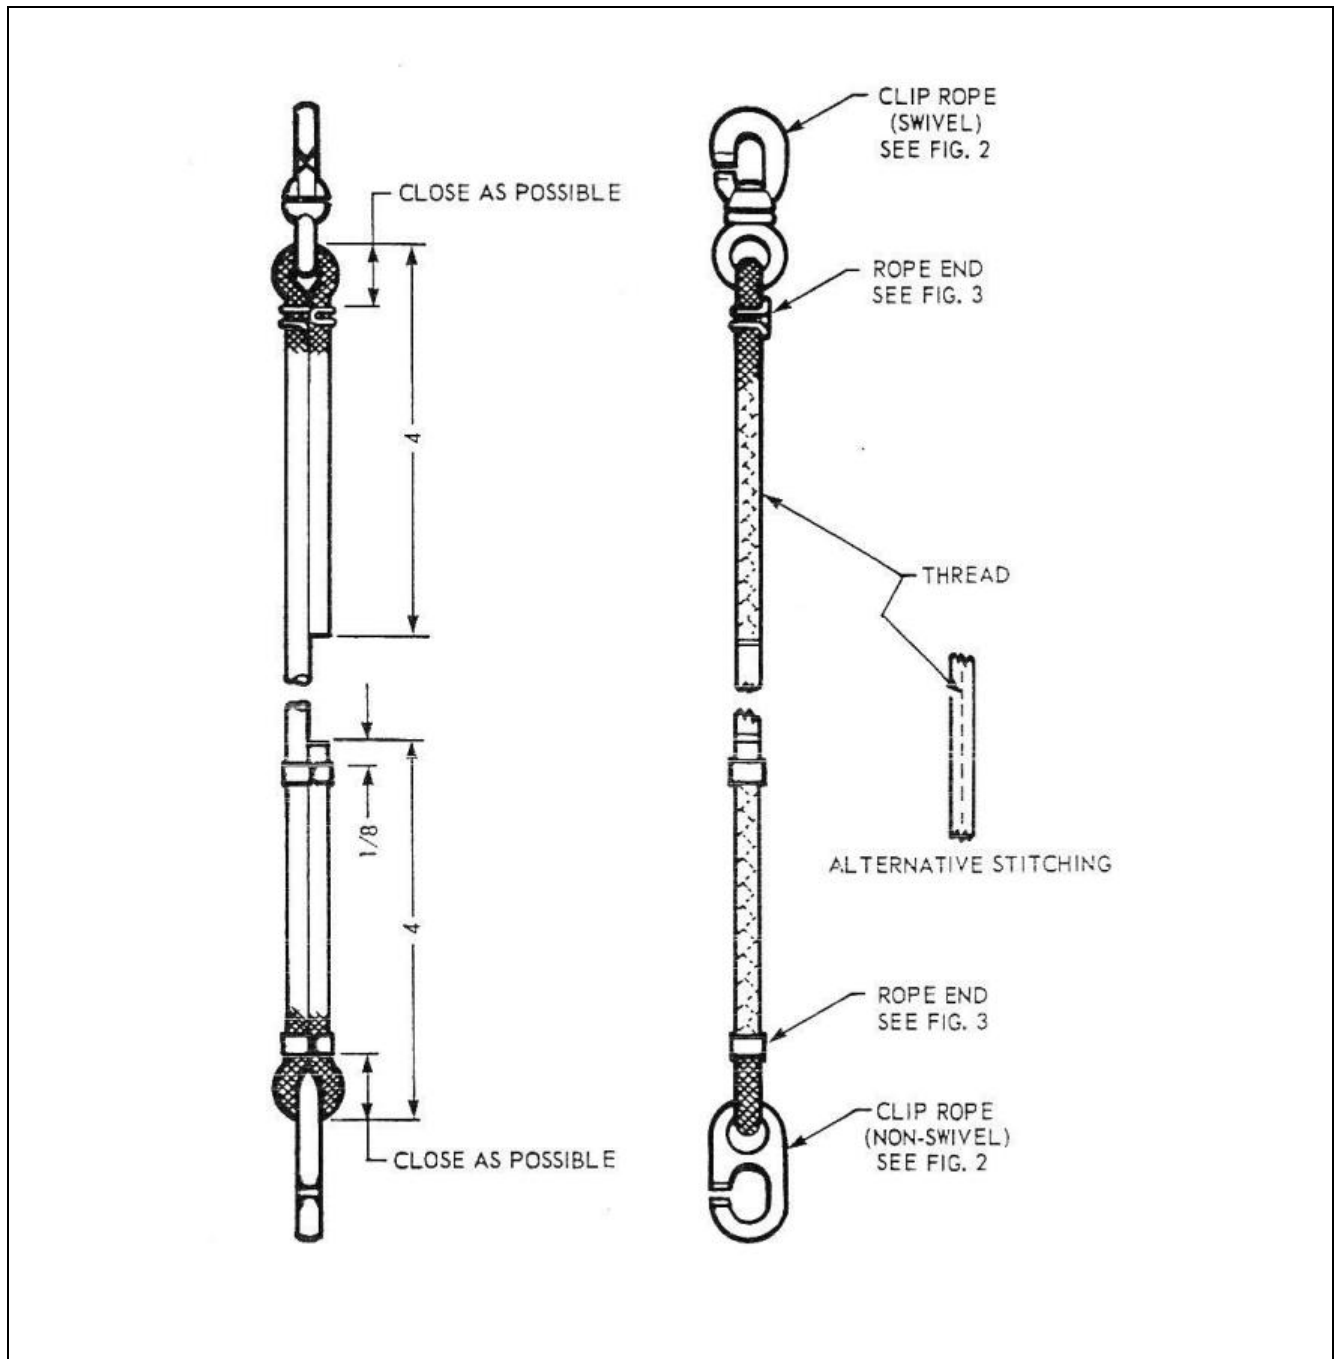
Rope and Clip Assembly / Figure 9. Assemblage corde et pince
